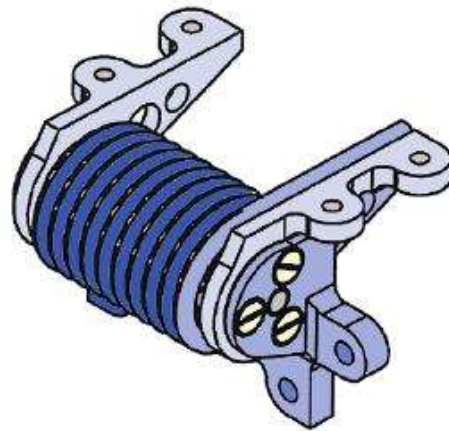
Solar Arrays Deployment Mechanism using Helical Torsion Spring [31].
